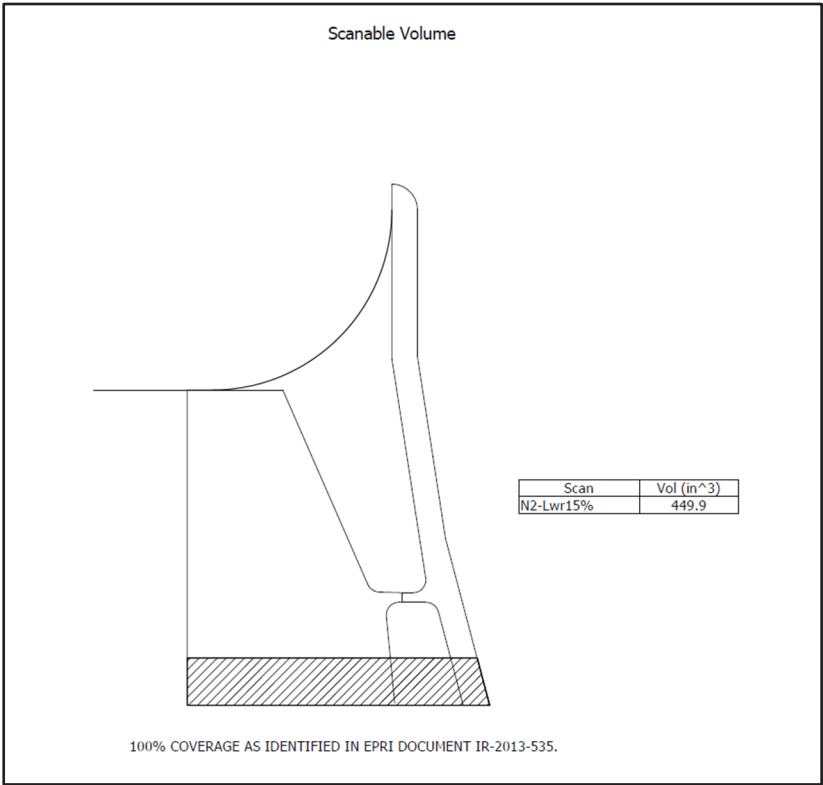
Weld N2F-NV, Inner 15%
